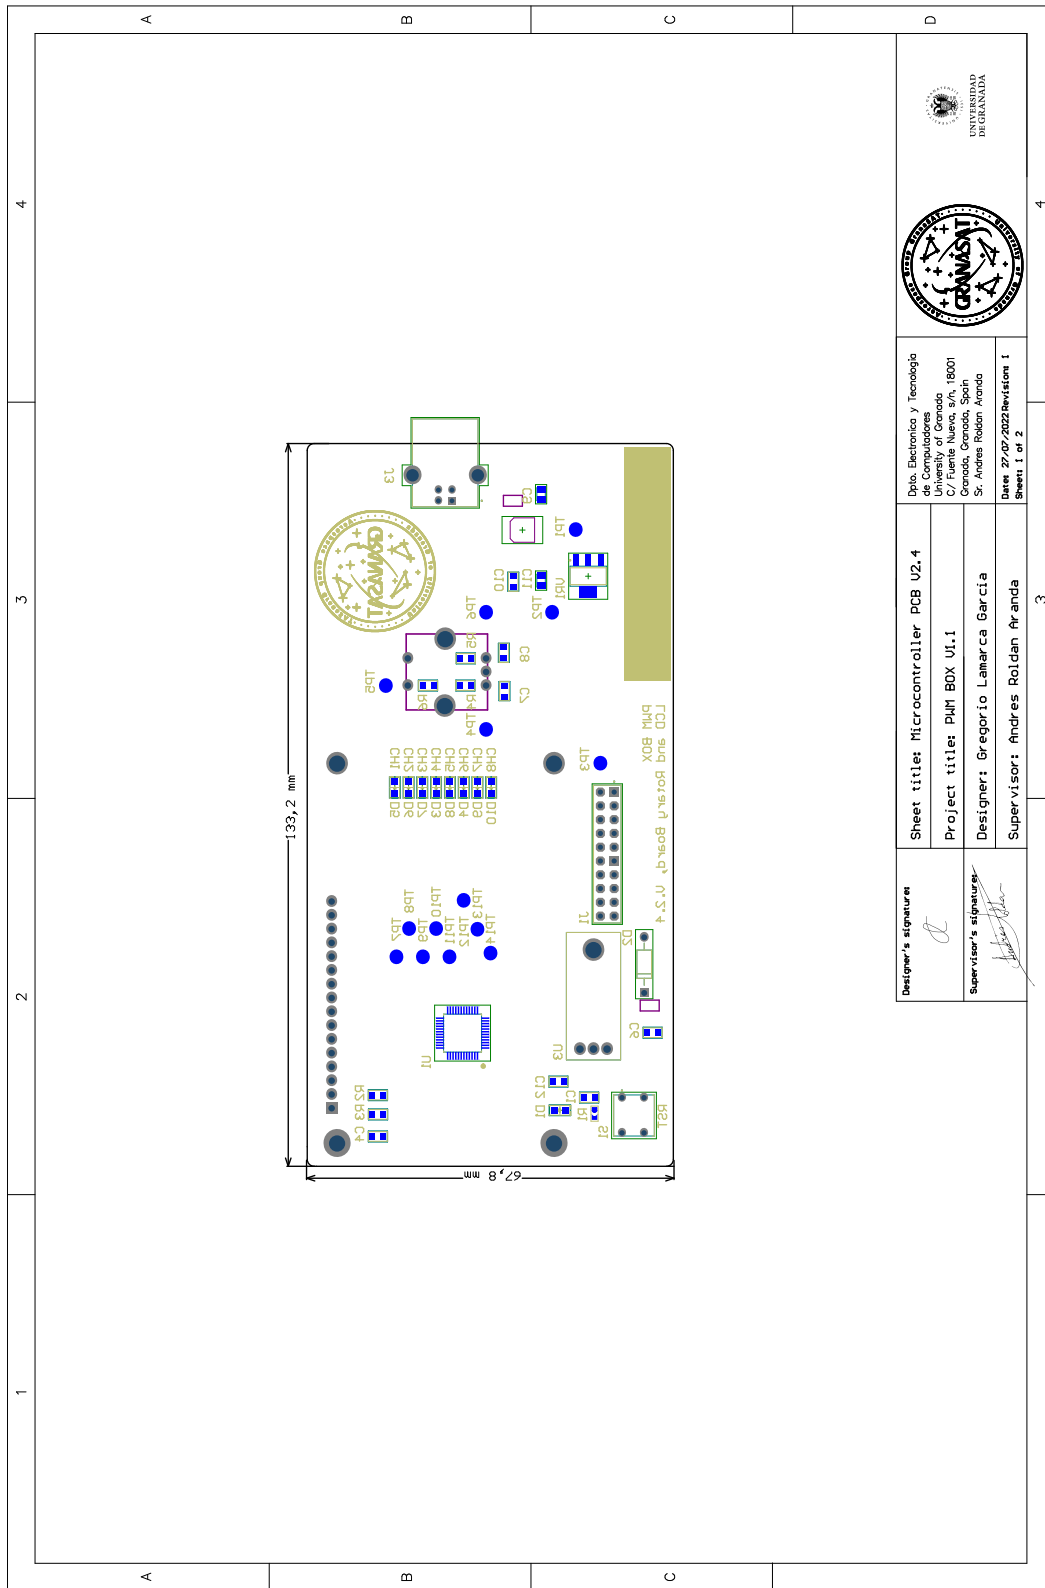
Bottom assembly in Microcontroller PCB project
